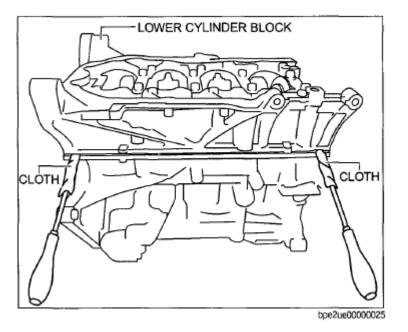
Peeling Sealant Away From Lower Cylinder Block Using Cloth Wrapped Screwdriver
